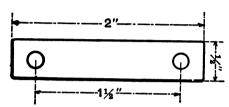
Contact Lever Showing Size and Where Holes Are Drilled.
